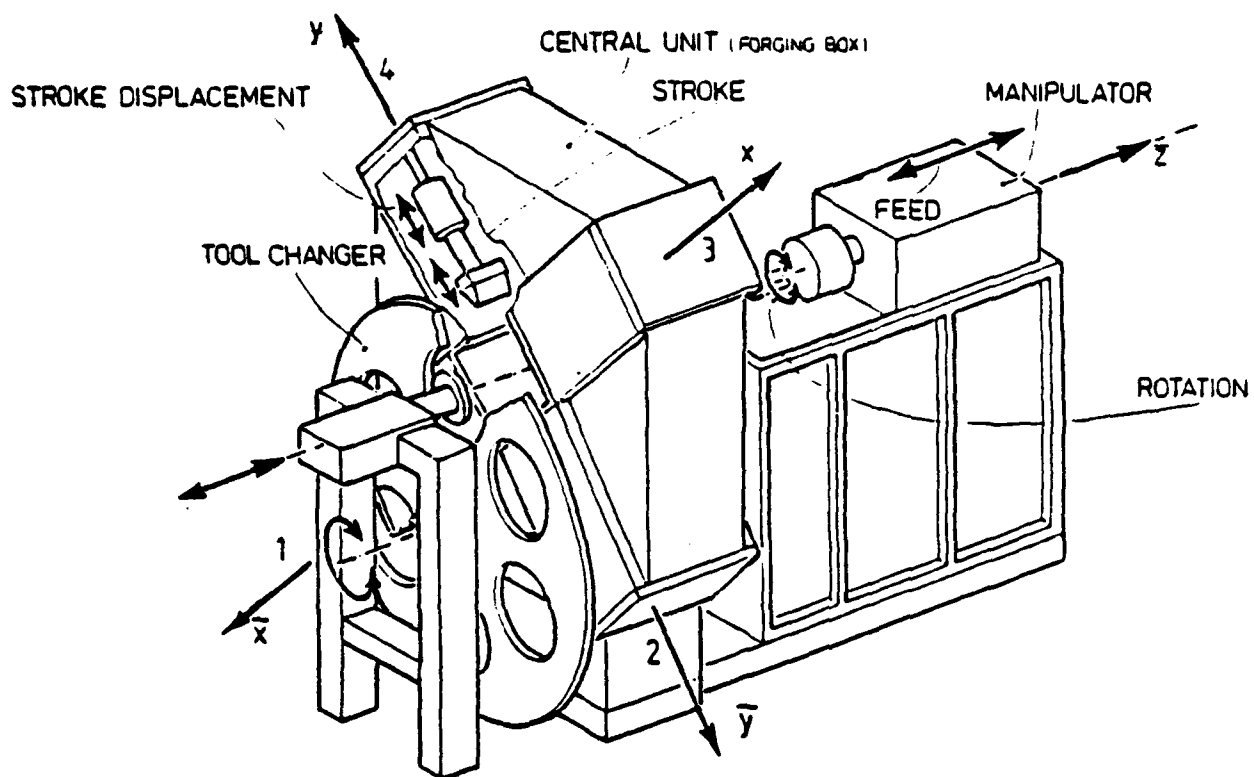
SMS Hasenclever Four Die Radial Forging Machine with Tool and Workpiece Motions (Ref. 11).
